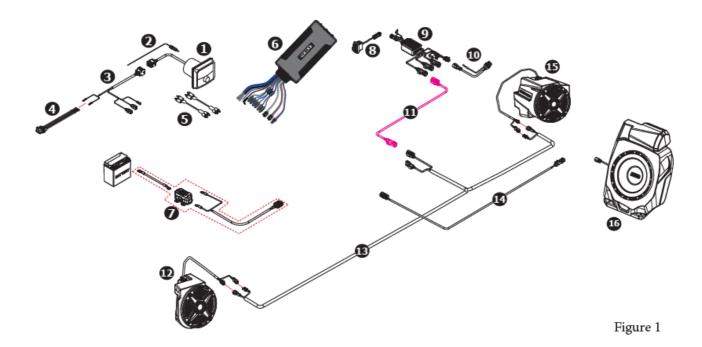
is designed to show the installer a reference overview of the complete 3 speaker RGB wiring diagram.
